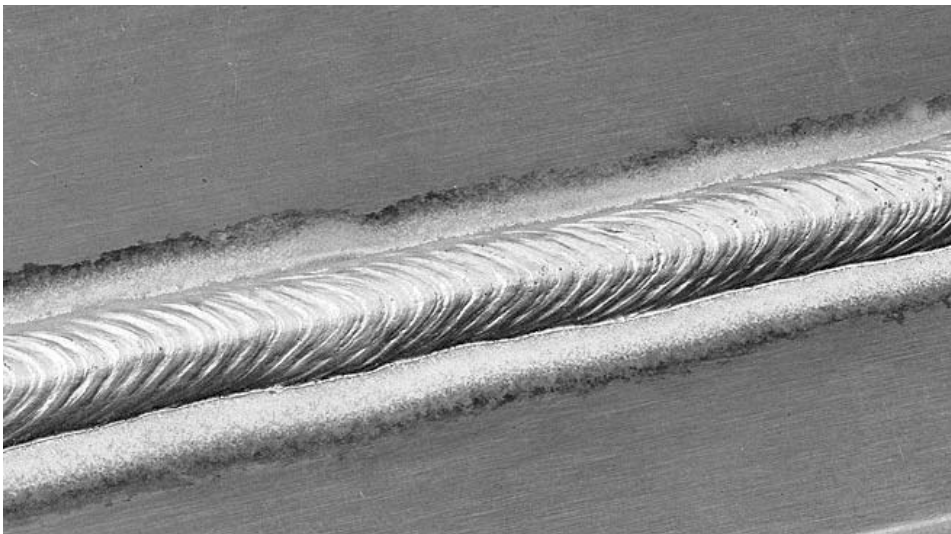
A weld in 3 mm aluminum made using Pulse On Pulse welding.
